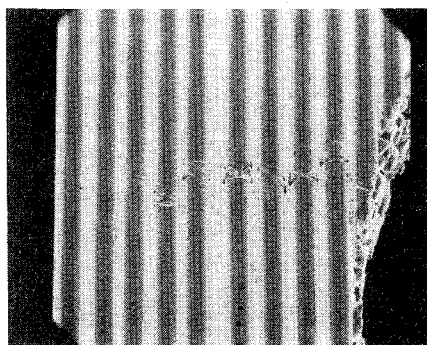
Slow crack growth in $(0/\pm 45)$ B/Al; closeup of crack in bolt-bearing specimen.
